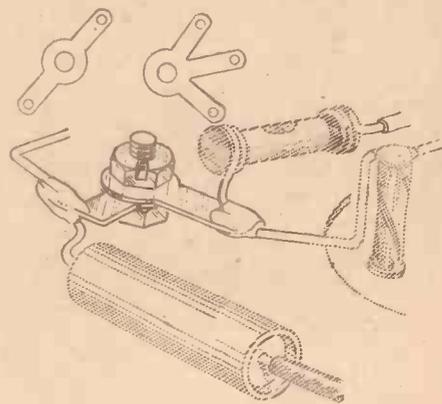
Multi-ended soldering tags simplify the attachment of several parts to a given point.
